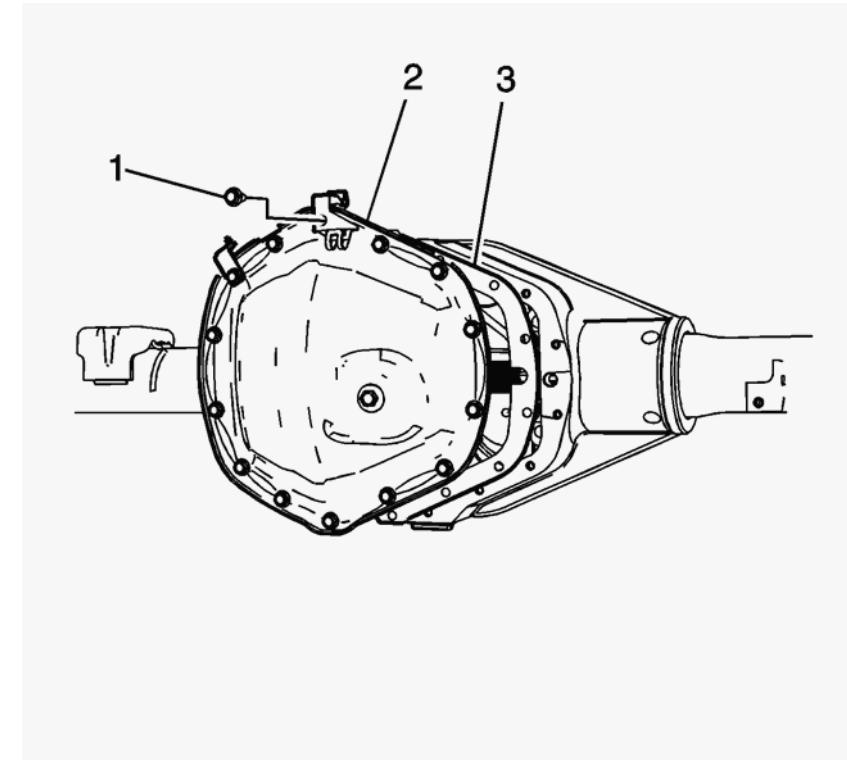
Rear Axle Cover Bolts, Cover And Gasket
